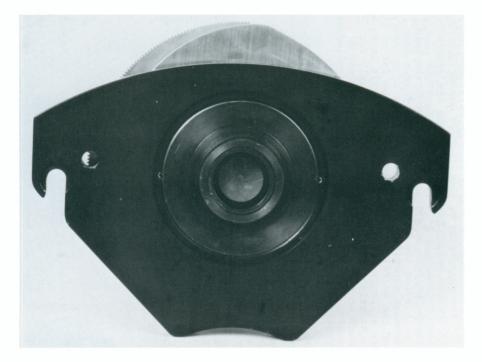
above..Rear view of assembly showing lens retaining rings and heavy black mounting plate. Fig. 6..below..Lens component, with retaining ring, removed from housing. Note aperture linkage slot and pin mechanism which mates with a groove in the actual TV housing, adjusted by large toothed dull chrome ring. The last 4 digits of the serial number (3254) are scratched into lens barrel, thus indicating matching of units.
